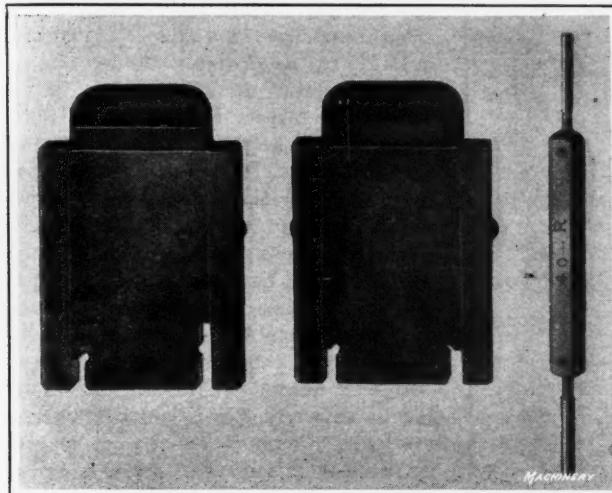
Snap Gage made by attaching Strips to Sides of Blank
